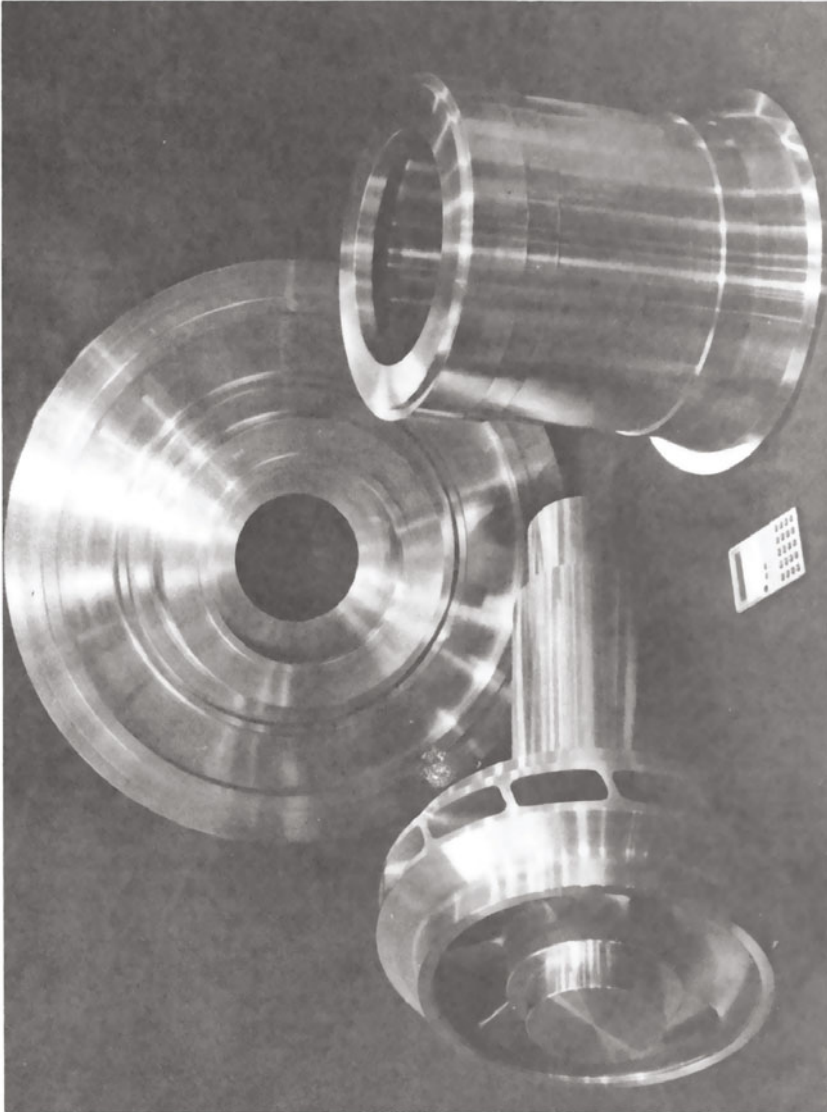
Turbine and compressor disks "near-net-shape" workpieces
